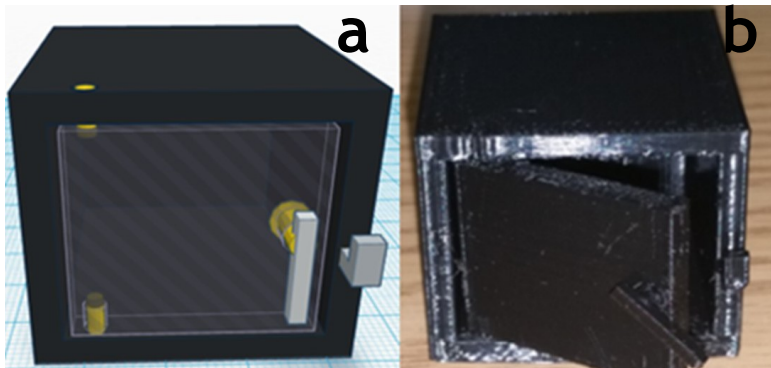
Box with movable doors and lock (a) CAD design and (b) prototype.
